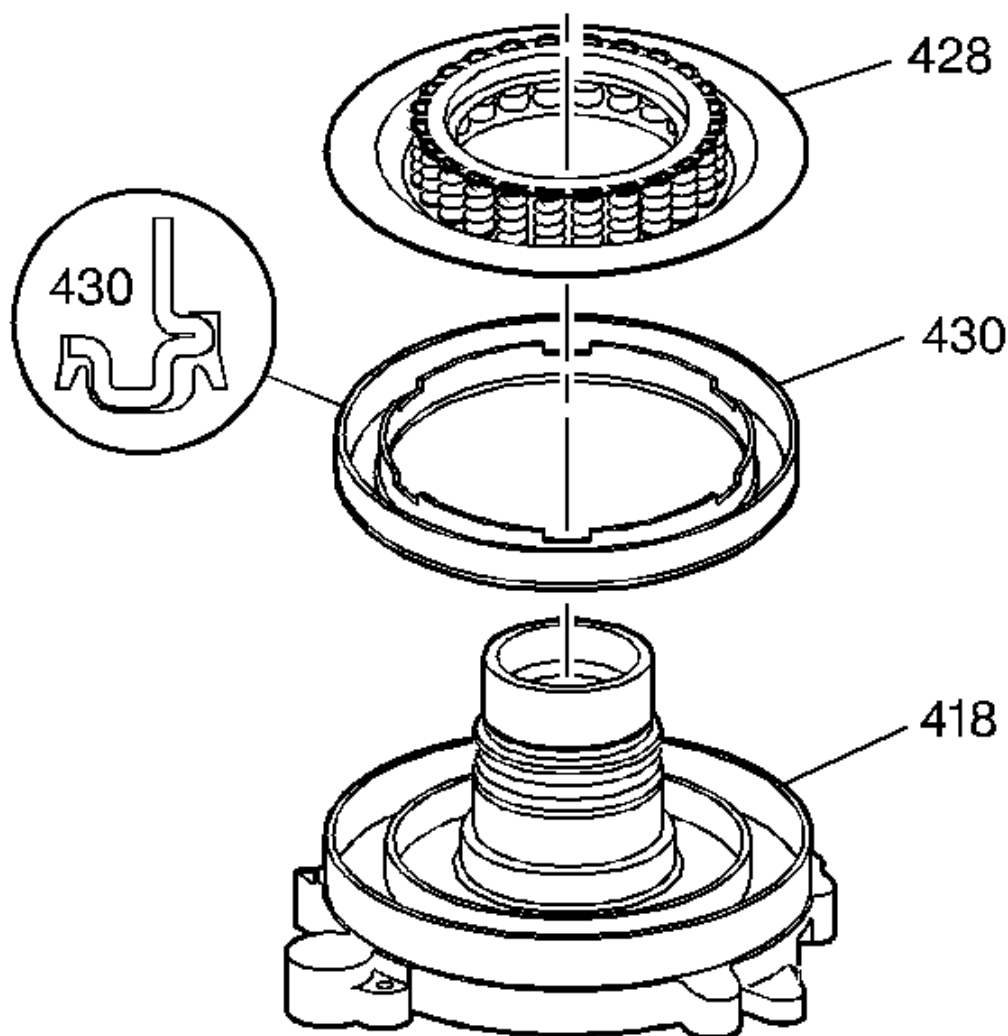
View Of Second Clutch Piston And Seal Assembly
